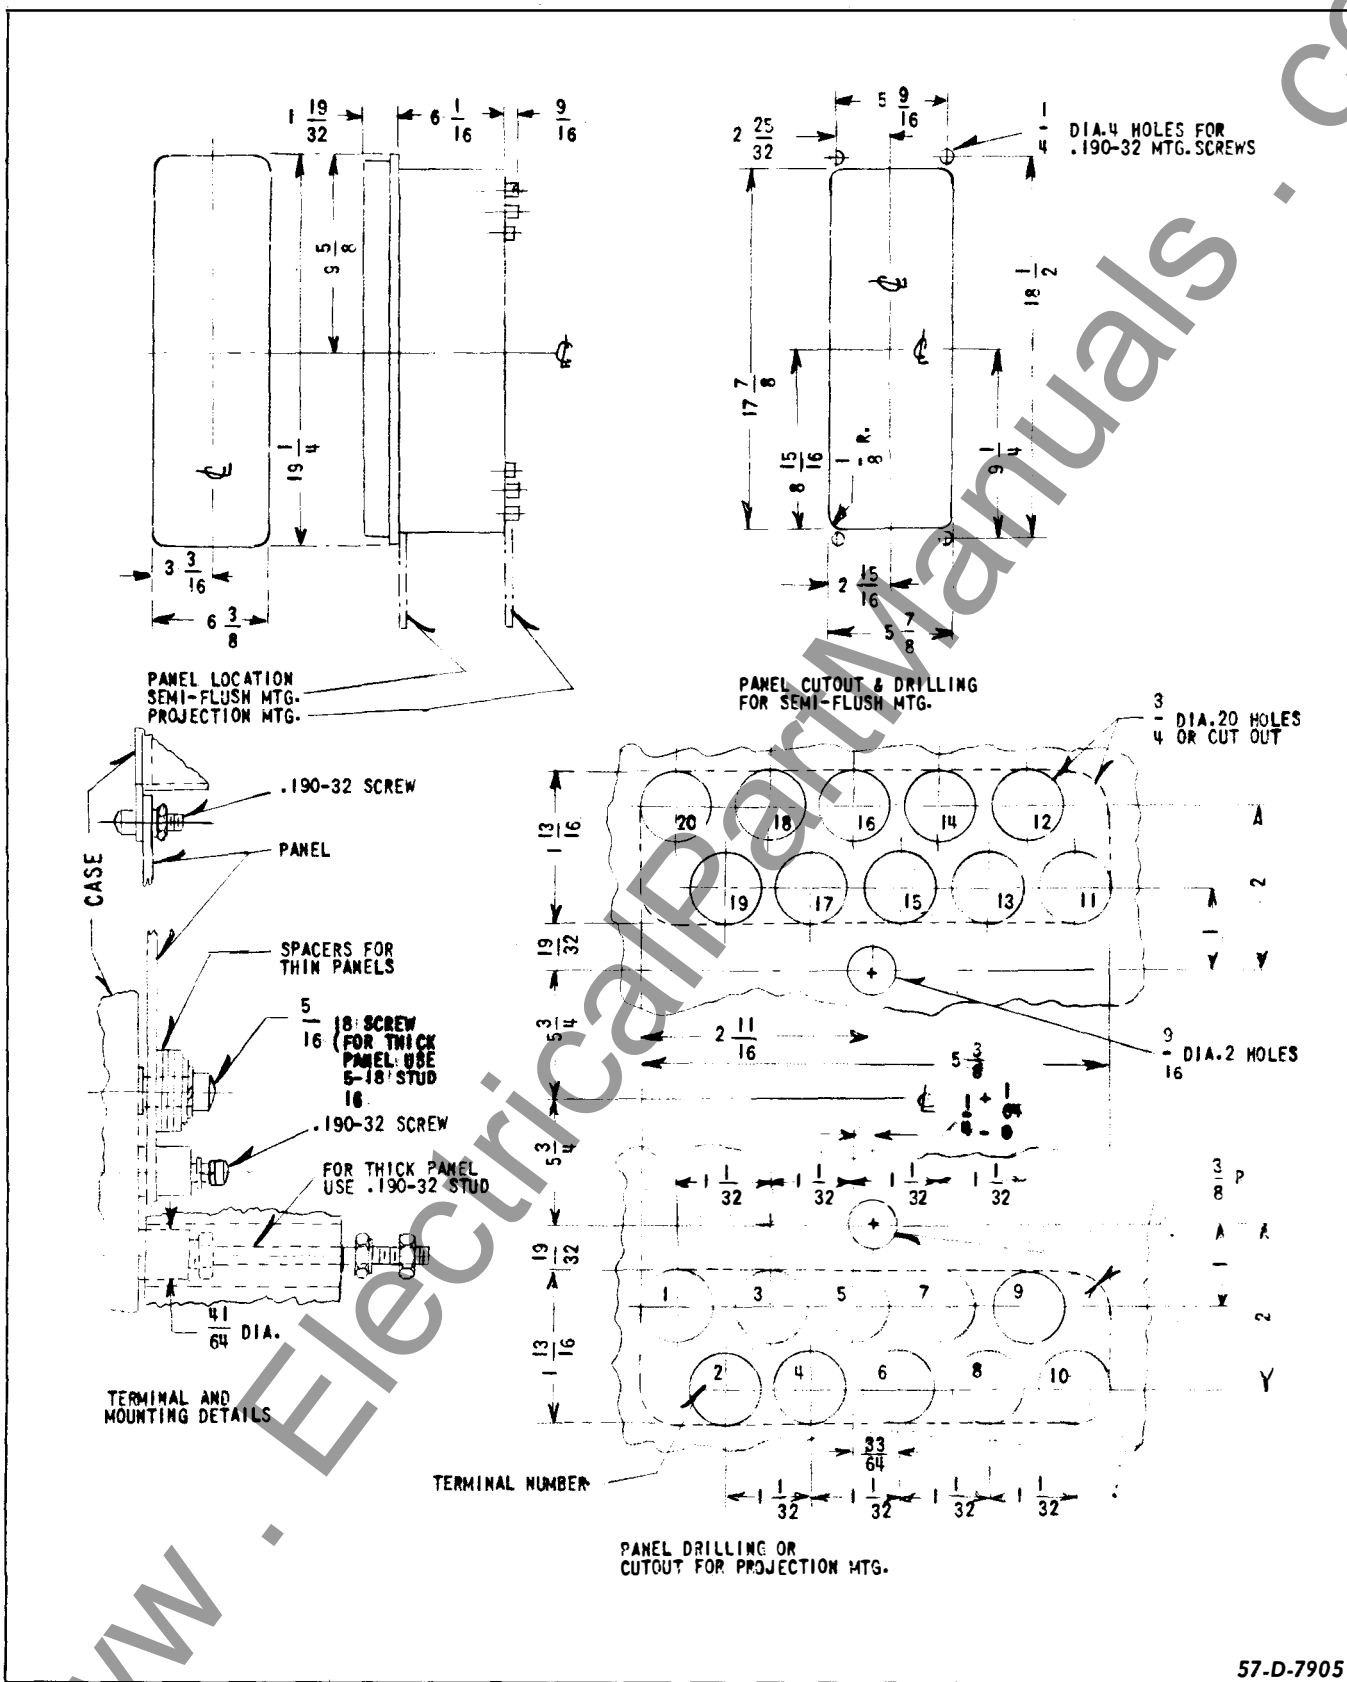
Outline and Drilling Plan of the SKB Test Transformer
